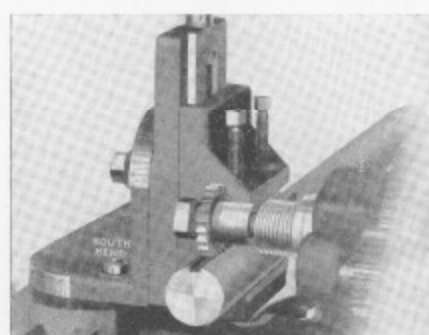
Cutting Keyway on the Lathe equipped with a Milling Attachment.
